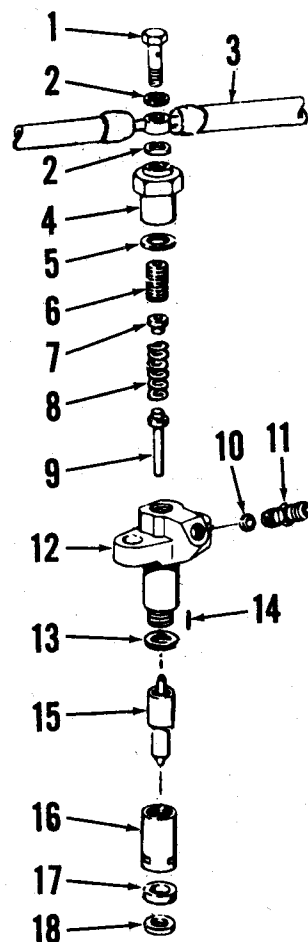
A—Exploded view of early injector. Refer also to Fig. 105.
